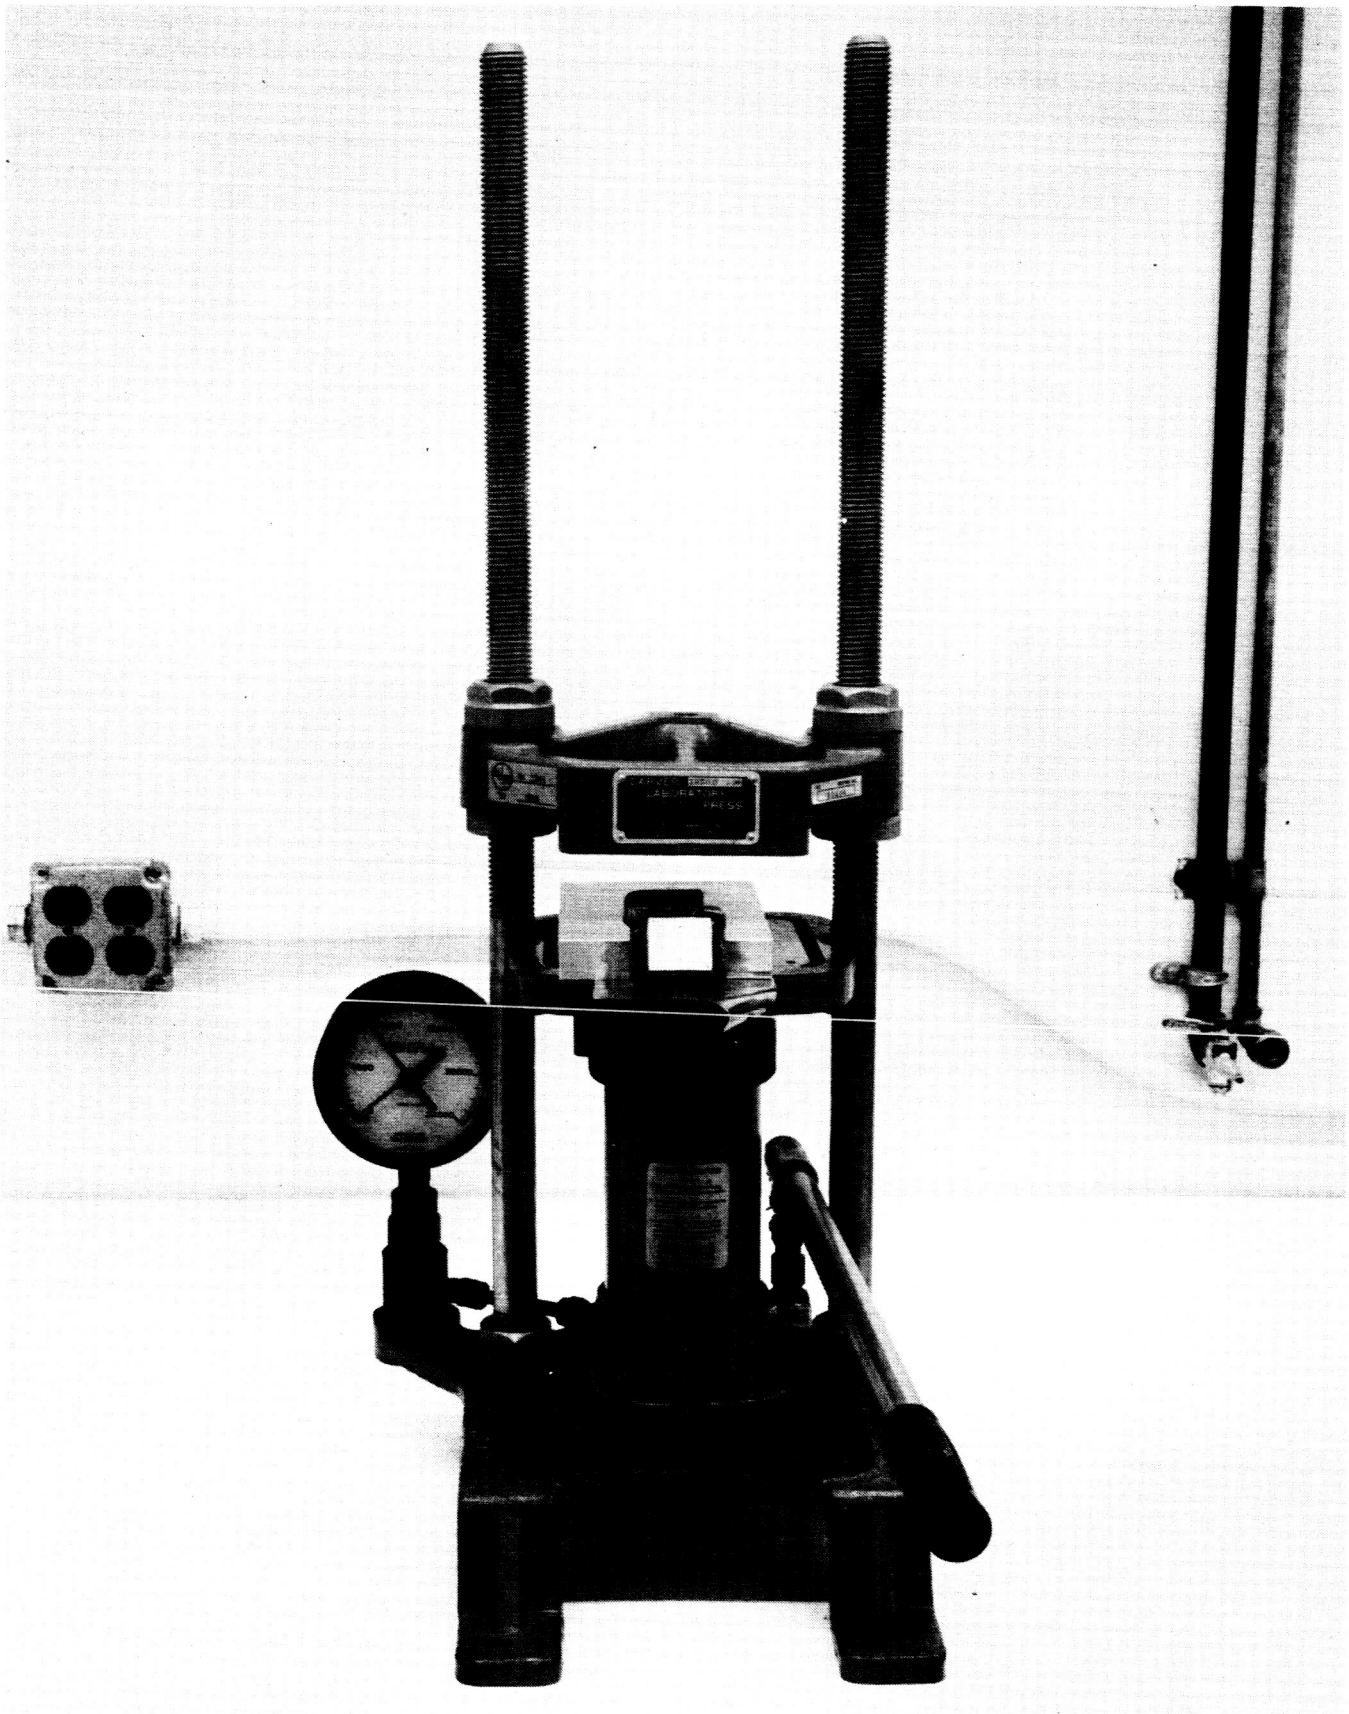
Hydraulic Press Used for Forming Absorber and Radiator Plates
